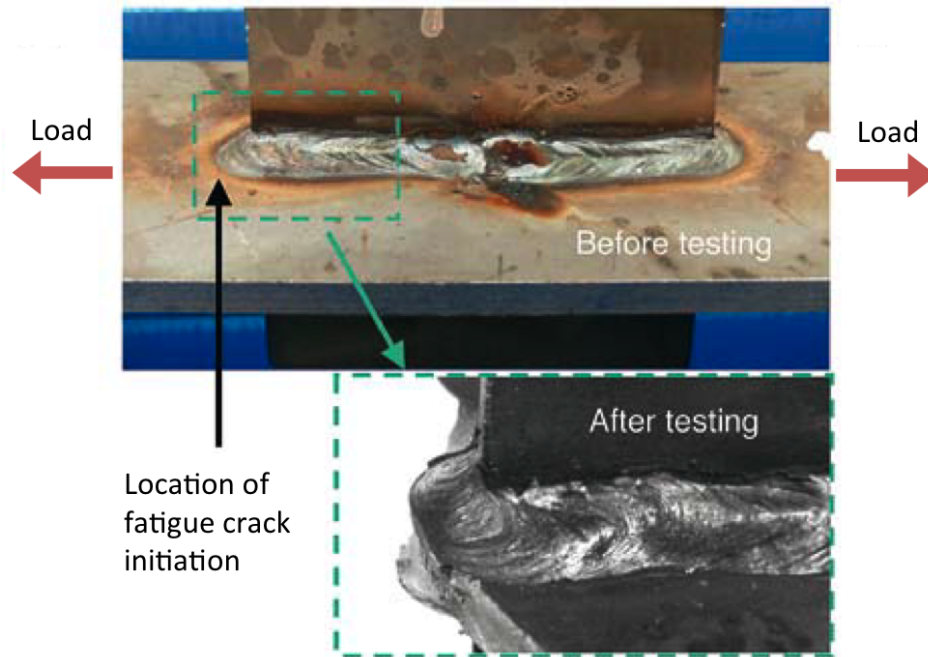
Fillet weld fatigue test specimen. Load is applied along the longitudinal direction and fracture ordinarily occurs at the fillet weld toe. The enlargement highlights the fracture surface at the weld toe [94].
